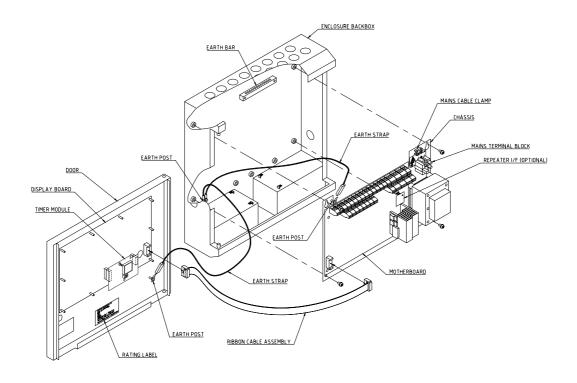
8/16 Zone Panel – General Assembly [with optional clock/time module]
